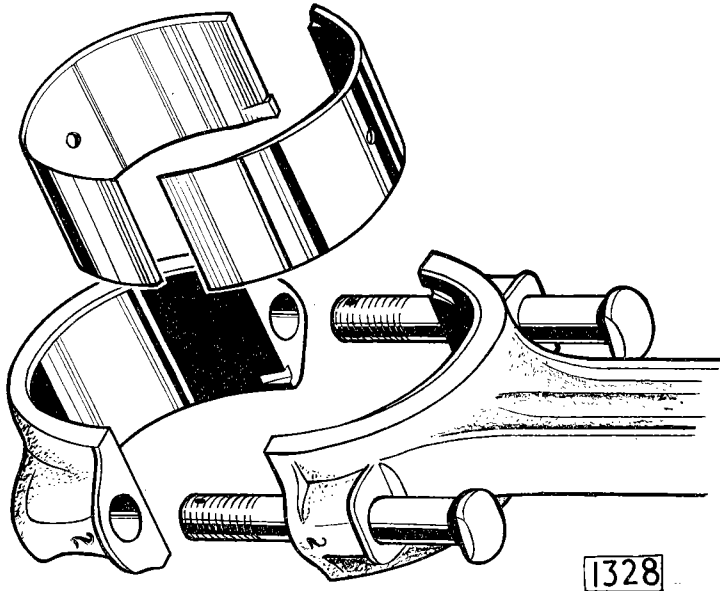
The connecting rod and cap are stamped with the cylinder number
